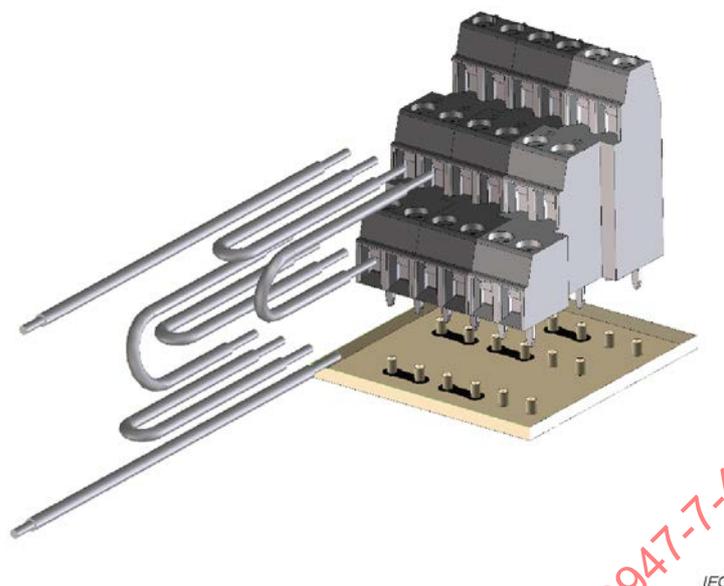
Example of wiring structure of a multi-tier PCB terminal block
